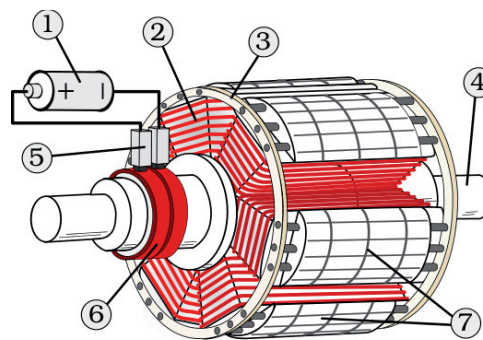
The salient pole rotor with damper winding: 1 – source of constant voltage, 2 – field winding, 3 – damper winding, 4 – shaft, 5 – brushes, 6 – rings, 7 – poles
